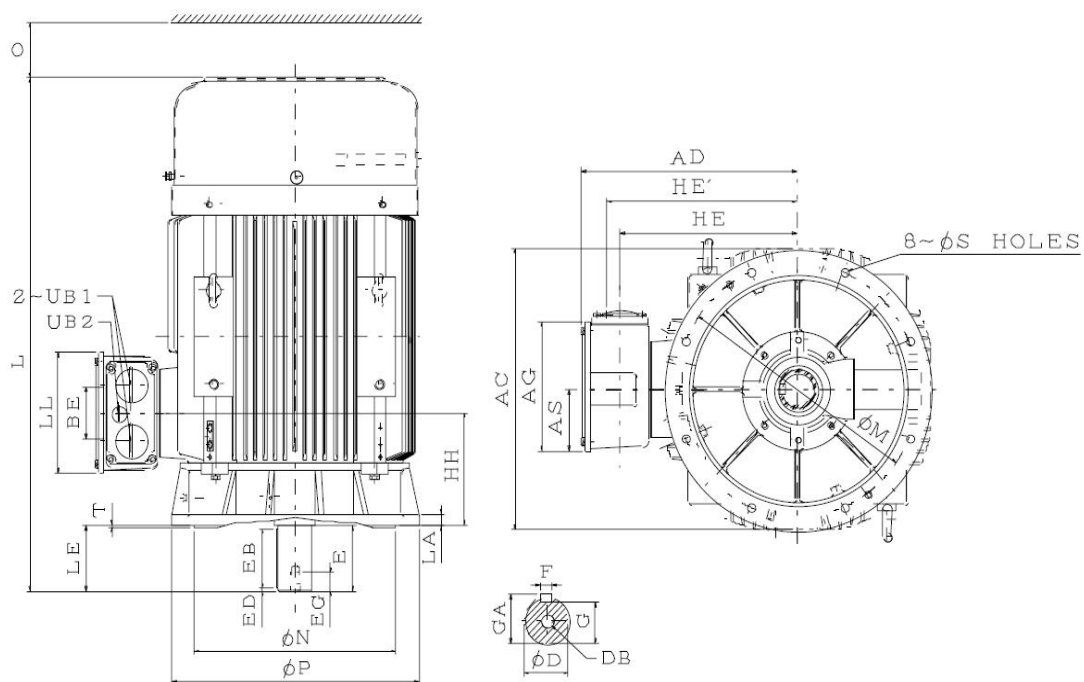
Outline drawing of cast iron design, mounting V1; frame size 280
